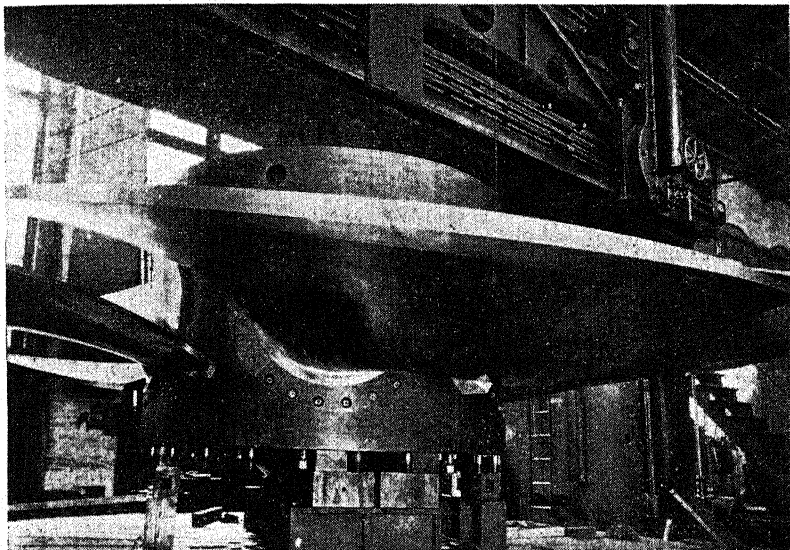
Finished prewelded runner blades mounted in runner hub.
